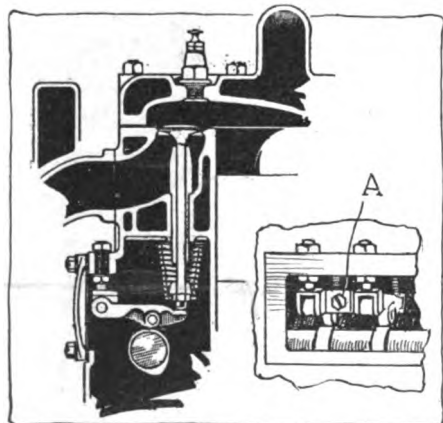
Valve mechanism of six motor. The bolt A must be loosened before the screws to which the cam levers are pivoted may be raised or lowered. To remove the valves these levers must first be taken out to provide room for lifting out the valve spring key
